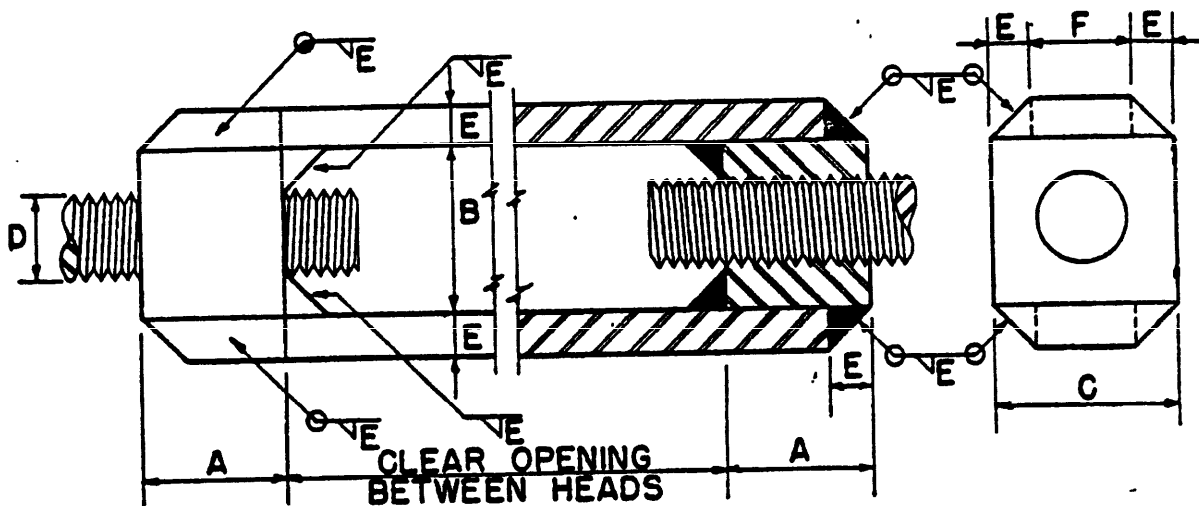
Type I, form 4, open turnbuckle body, arc or gas welded.
